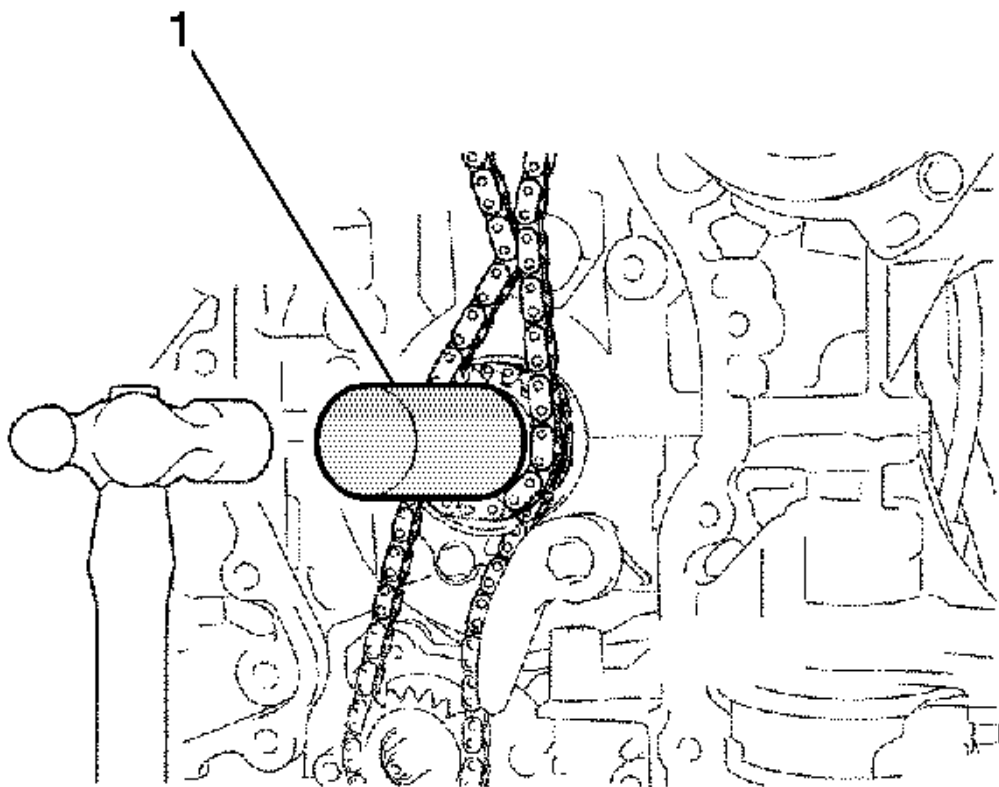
View Of Crankshaft Timing Sprocket Installation
